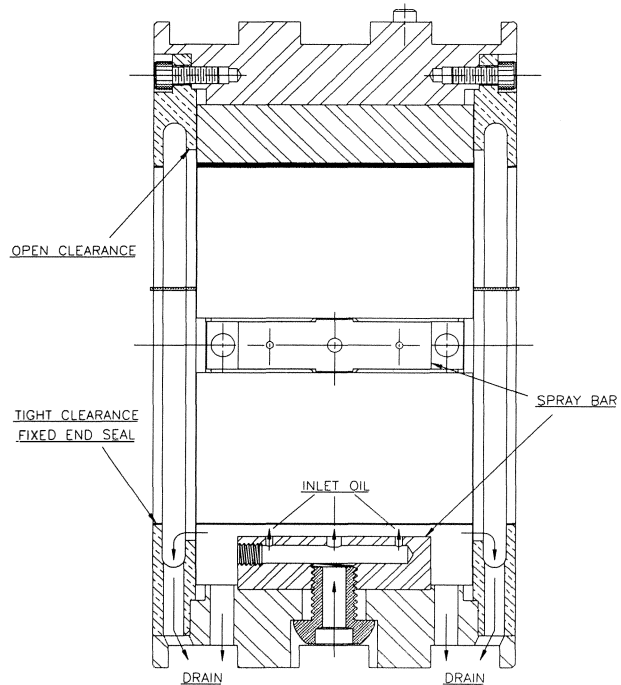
Evacuated Housing Spray Bar Tilt Pad Bearing Design.
